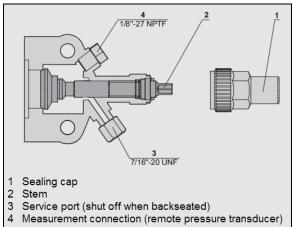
COMPRESSOR SHUT-OFF VALVE IN FRONT SEATED POSITION
